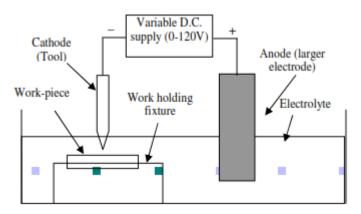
Schematic of electrochemical discharge machining (ECDM) setup [24].
